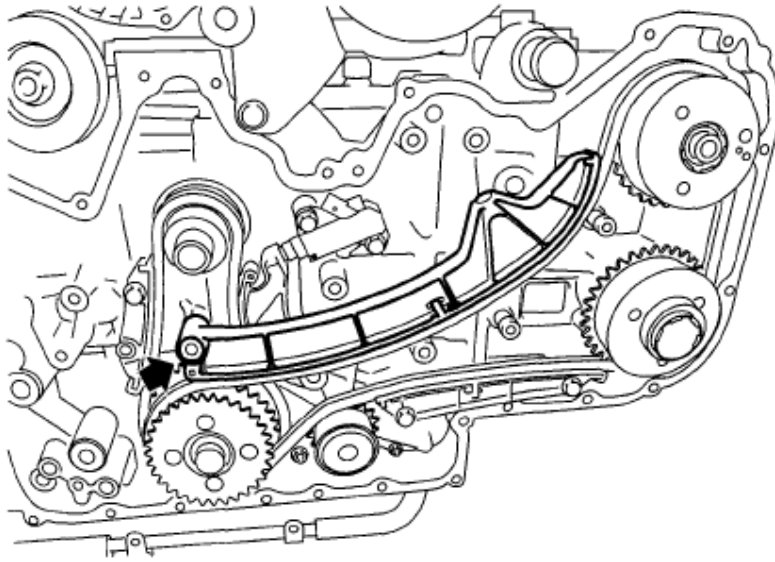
Locating Chain Guide Bolts (LH: Between Cams)
